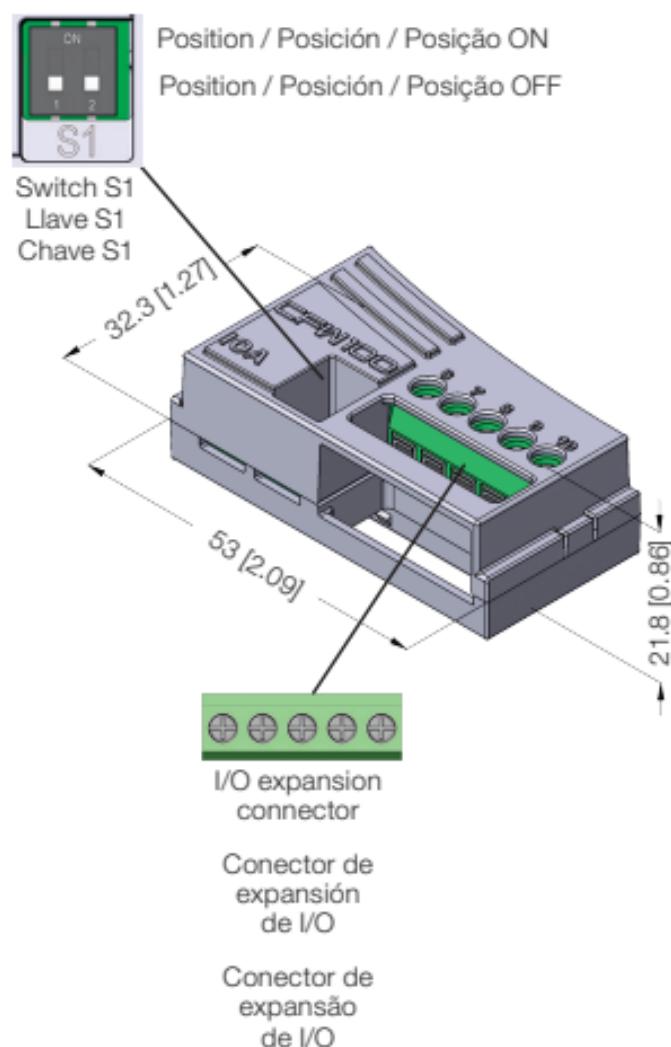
CFW100-IOA dimensions in mm [in] and connectors location
